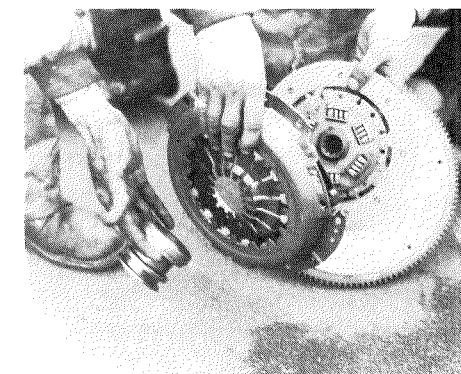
Component parts which you should replace include the thrust release bearing shown in its carrier - remove and press a new one back in; pressure plate and friction plate behind. On reassembly ensure the friction plate is mounted the correct way around - it is clearly labelled 'flywheel side'. Also when bolting down, ensure that the splines are aligned to the engine. An old input shaft pushed through is the best tool for the job. If you haven't got one, no doubt Gareth Thomas can supply you with one from the 95% worn boxes he comes across. Let me know how you get on.
